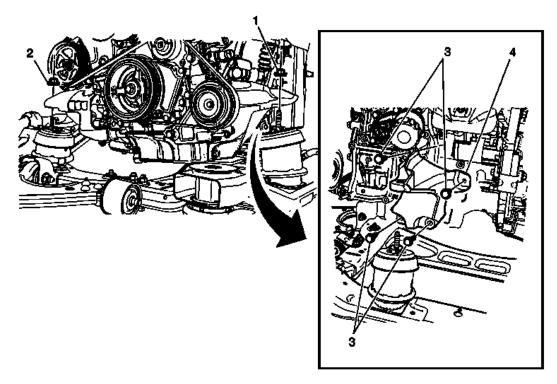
Identifying Engine Font Mount Assembly Components Courtesy of GENERAL MOTORS COMPANY
